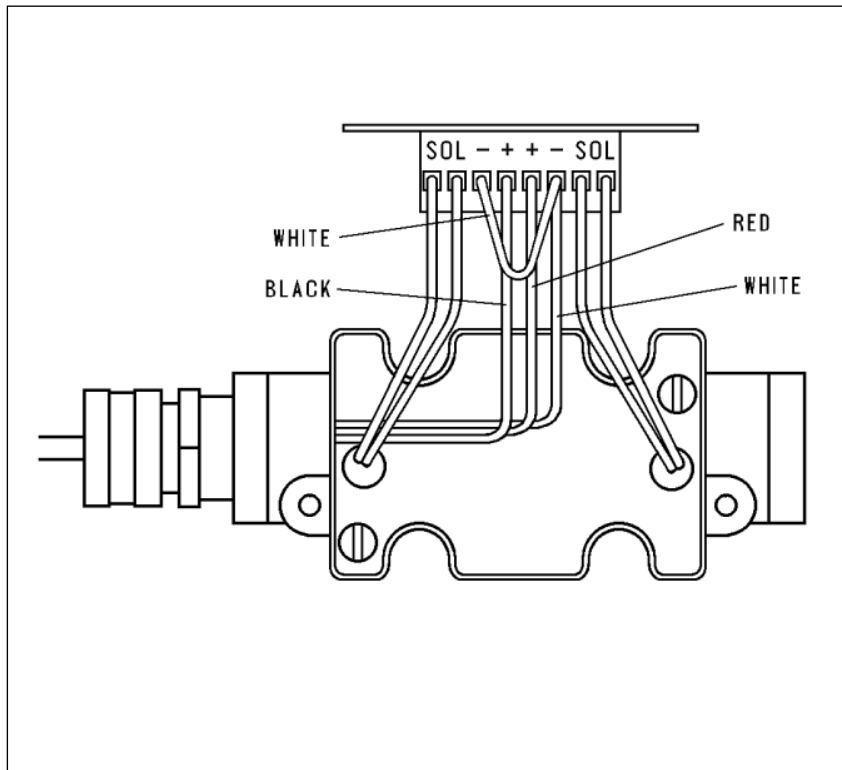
, Valve Wiring, Models VET-11 and VEX-11
